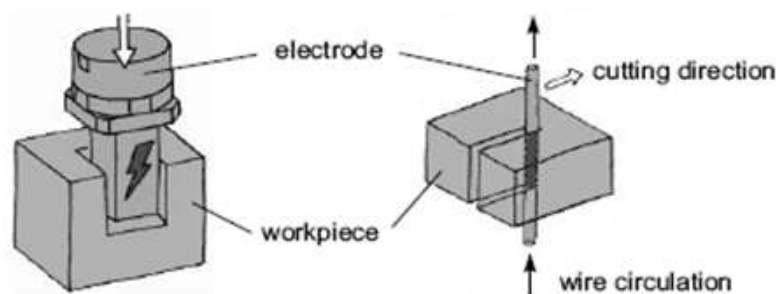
2 Die sinking & wire cut EDM Process [16]
